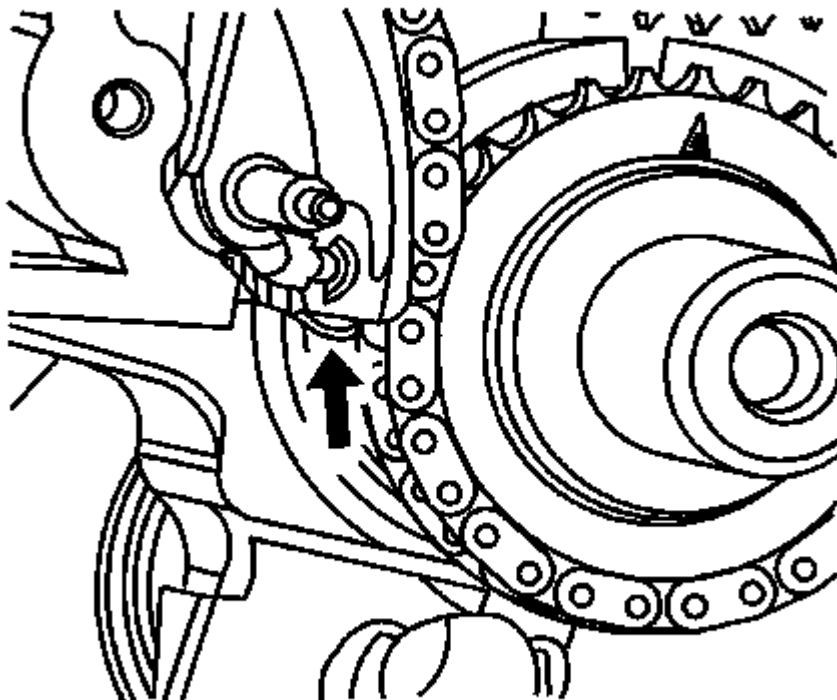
Illustrating Proper Timing Chain Tensioner Shoe Position Under Tab
